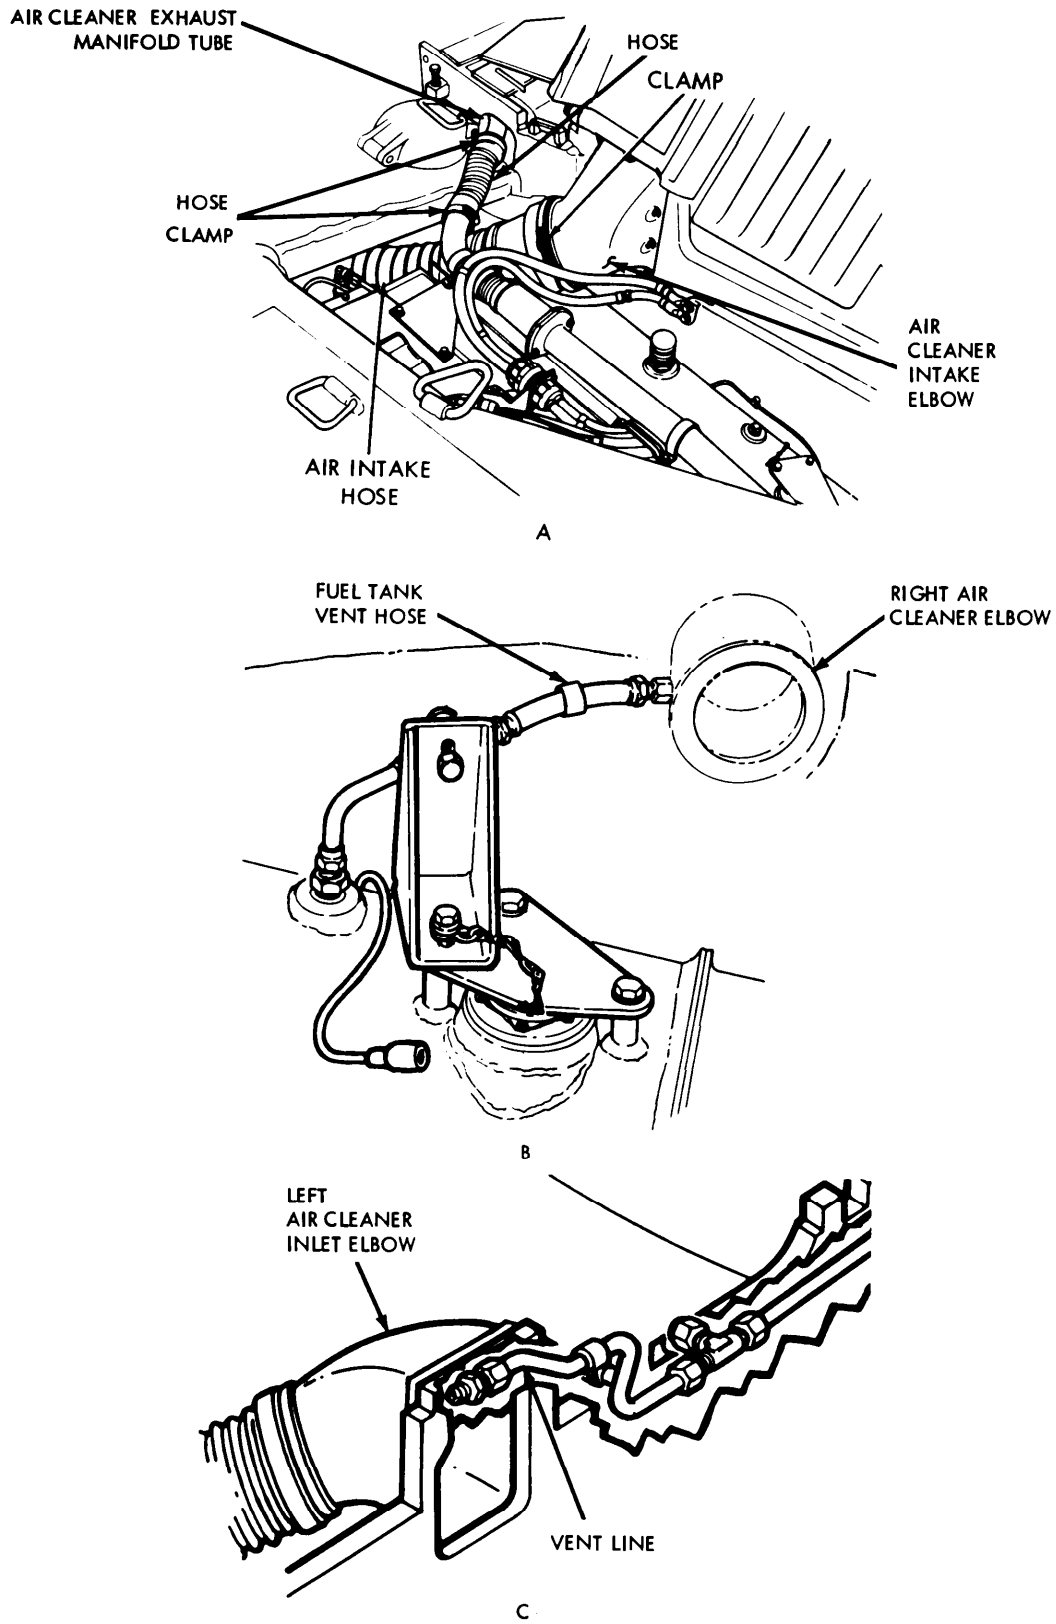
Air cleaner replacement (sheet 1 of 2).
